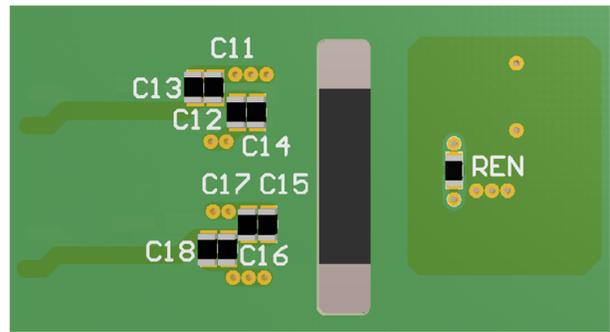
and Figure 9-5 are 3D layout pictures with top view and bottom views.
